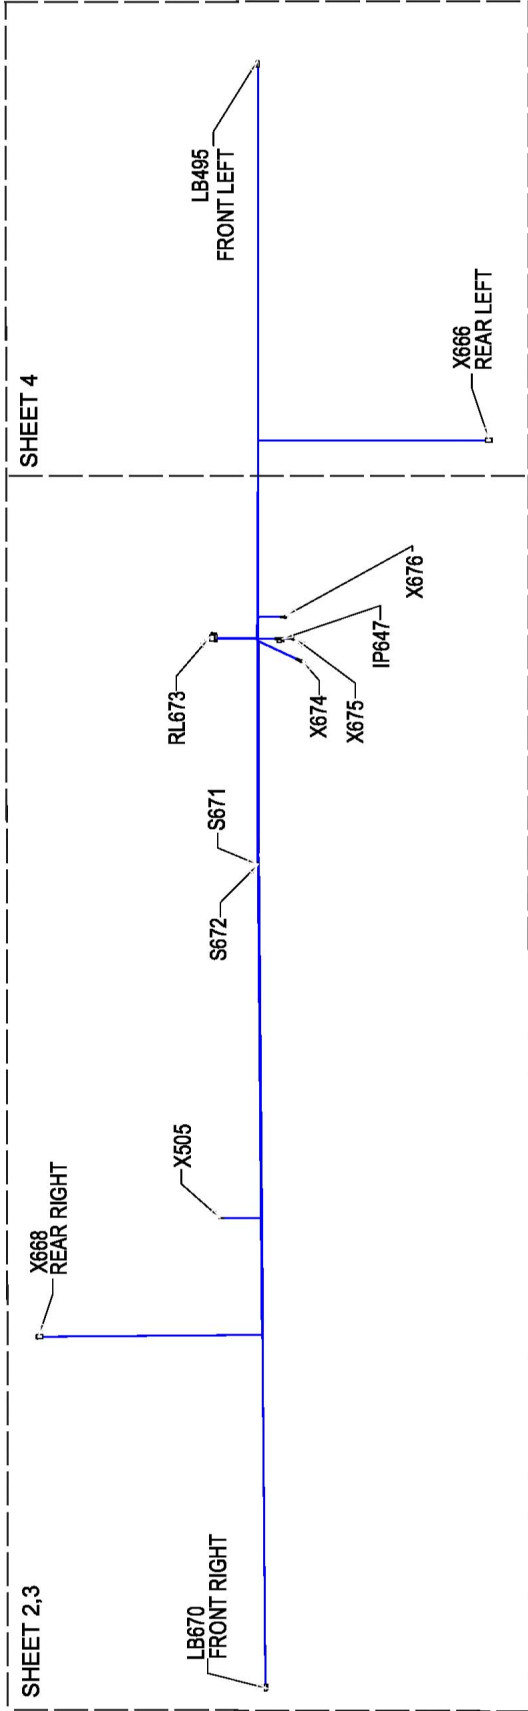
Chassis Head and Tail Lights Harness - Sheet 1 of 5
